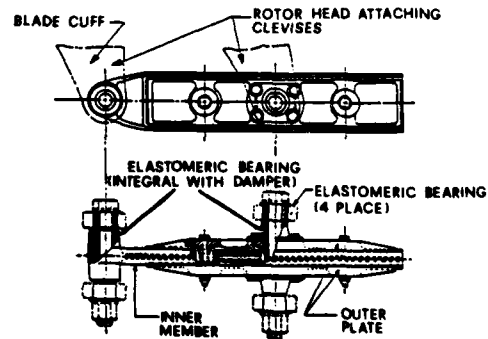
Cutway of elastomeric damper with elastomeric bearings at attachment points
